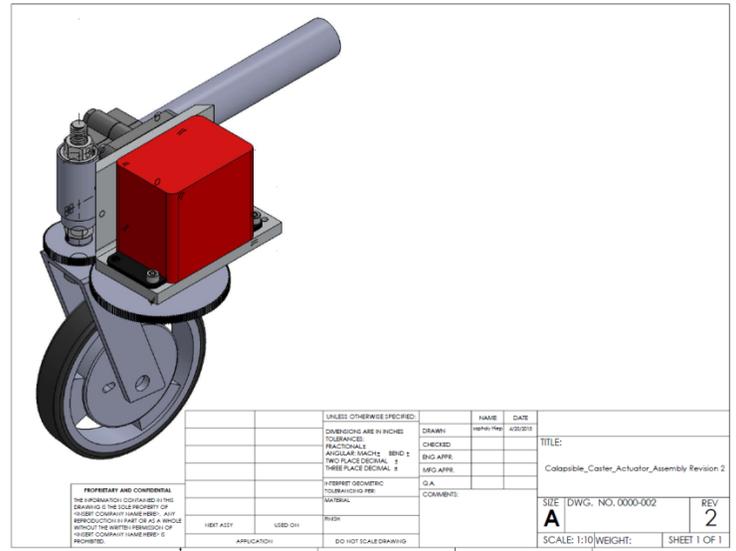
Third Iteration Fully Assembled Drawing [30]
